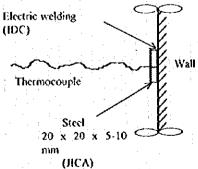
Welding Thermocouples to the Furnace Shell and Bottom
